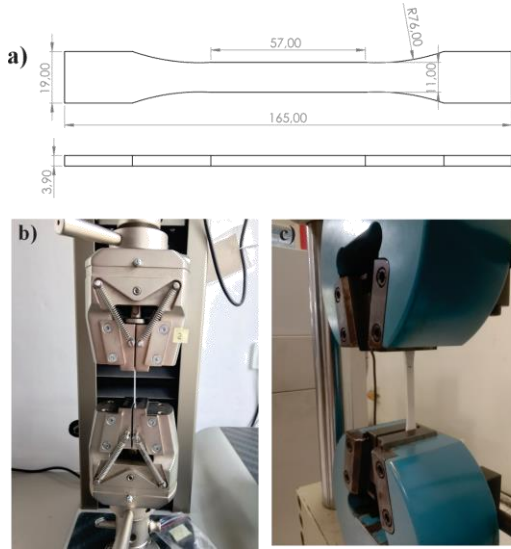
Sample design and mechanical testing setup: a) specimen design for tensile test, b) tensile test of filament, c) tensile test of three-dimensional (3D)-printed
